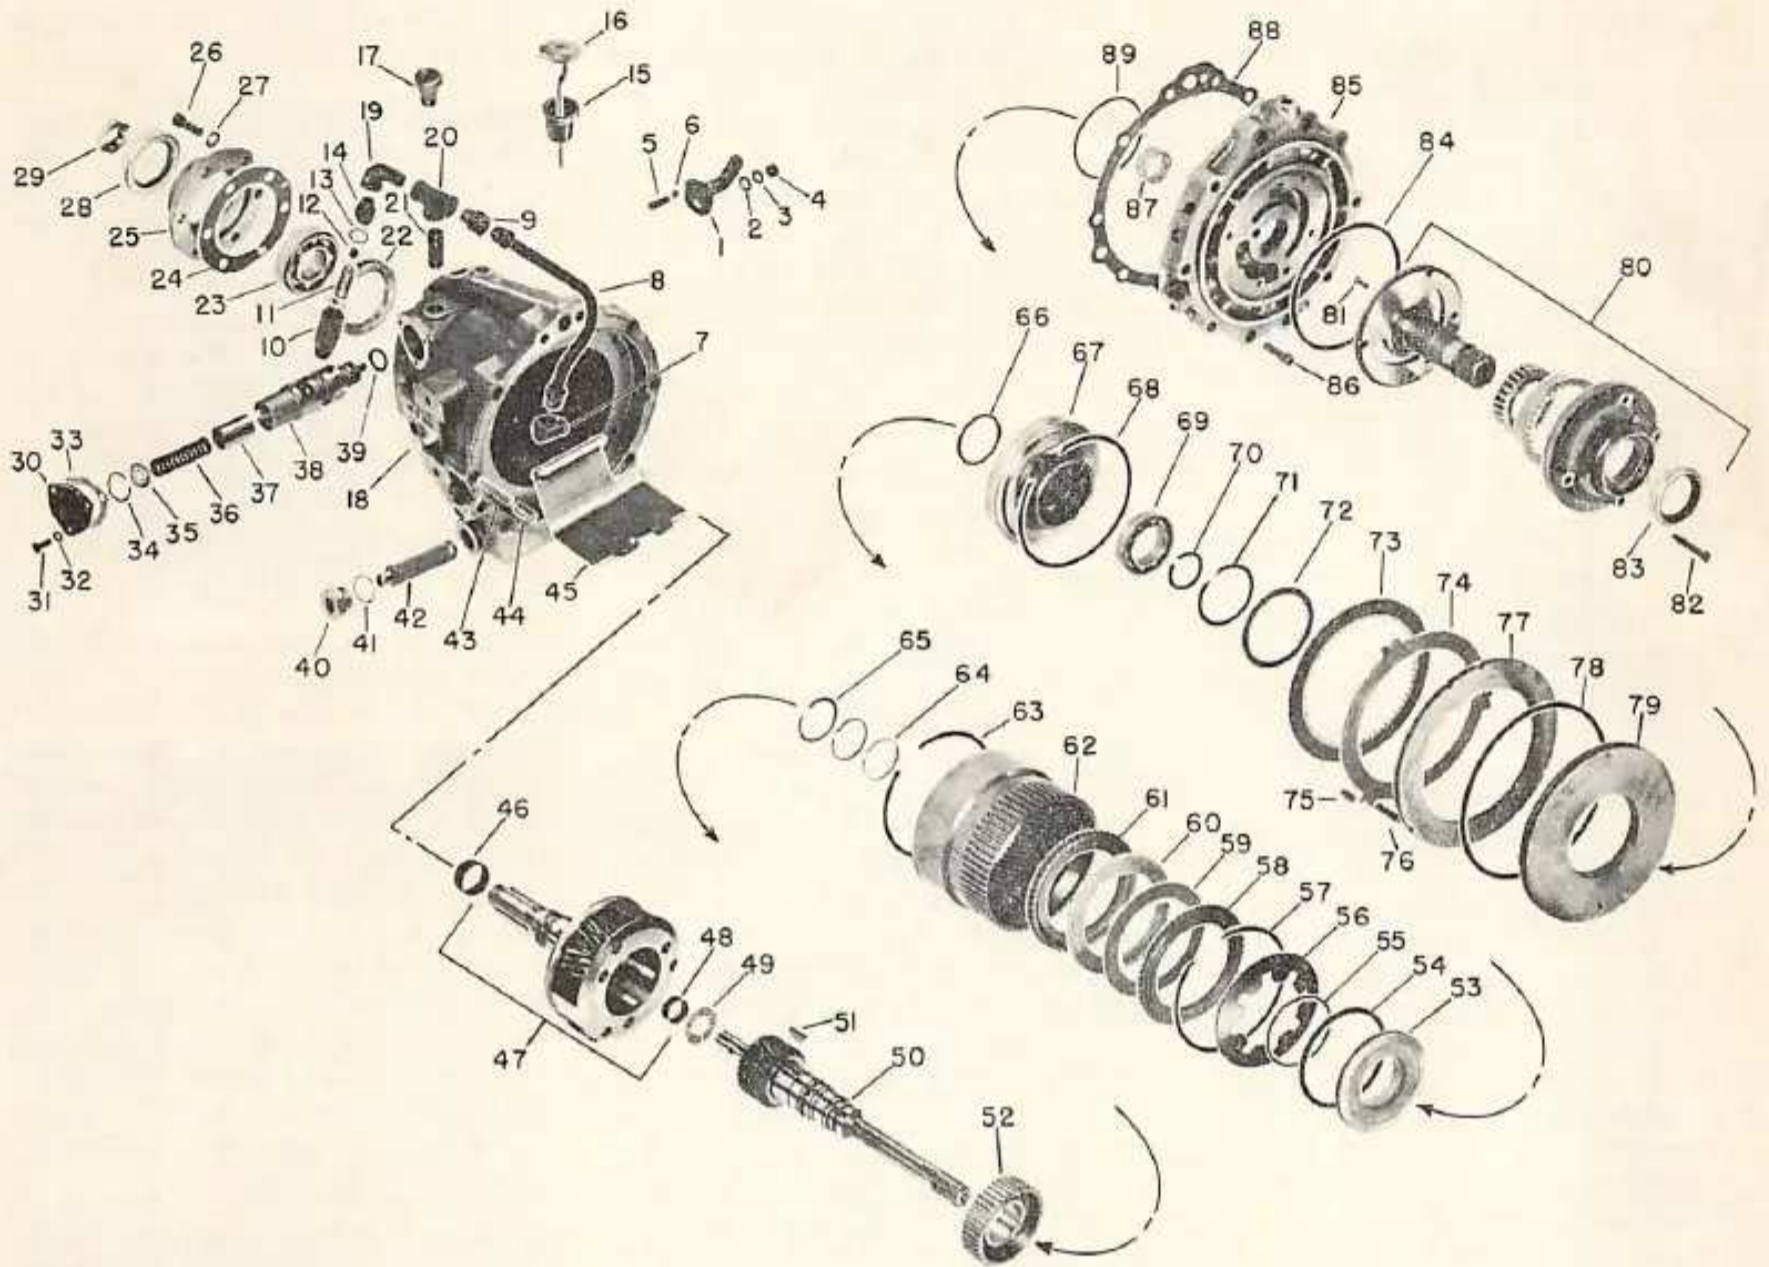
Exploded view of the Reverse-O-Torc drive unit showing component parts and their relative positions.
